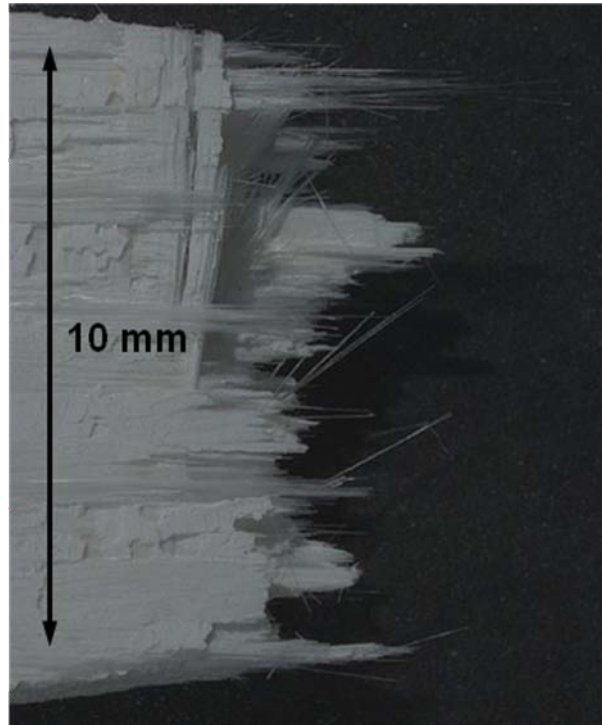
Fracture surface of the N720/AM specimen tested in tension to failure at 1100°C in laboratory air.
